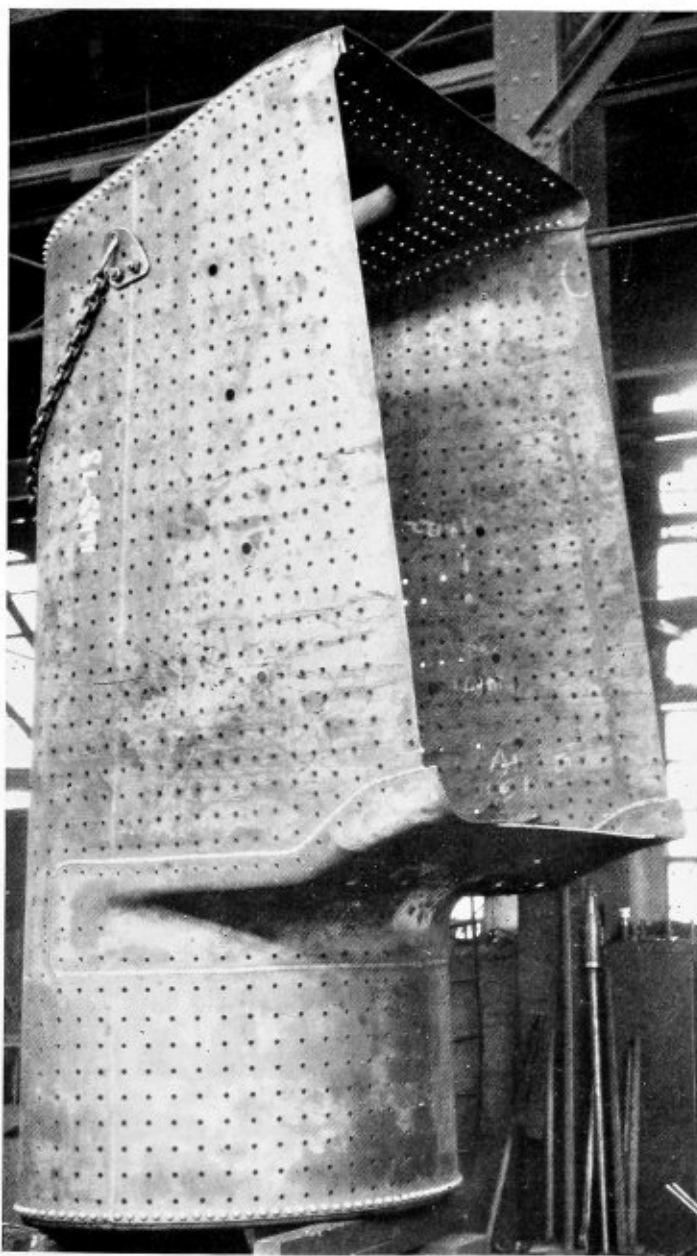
Wide firebox, with welded-in yoke sheet, completely assembled
